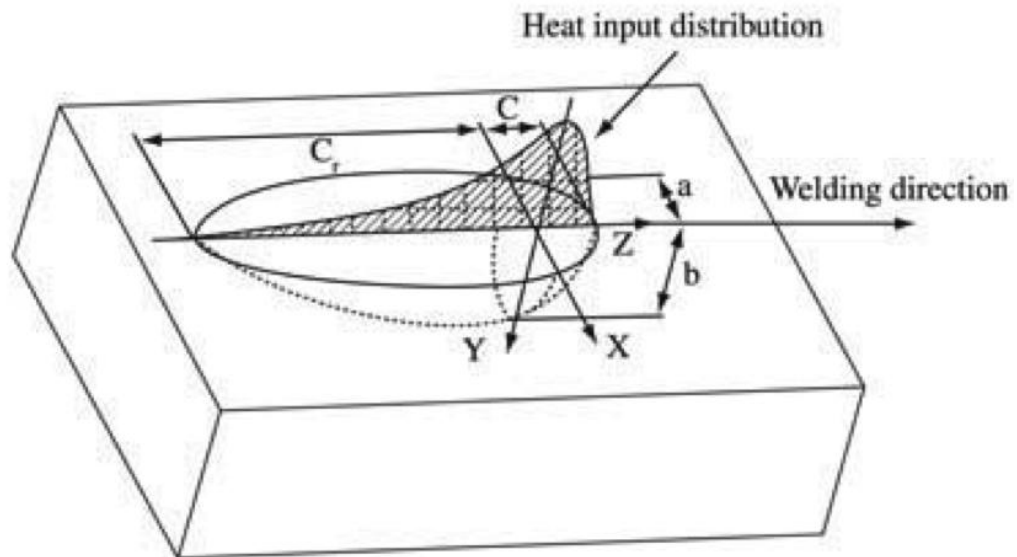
Double Ellipsoid Heat Source Model (Goldak & Akhlaghi, Computational Welding Mechanics, 2005)
